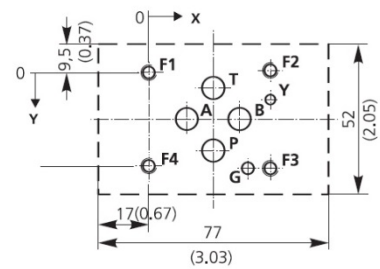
Mounting drawing of D633 series valve (Moog, 2005)
